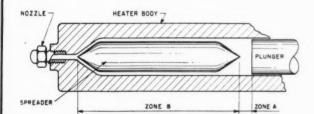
Cross-Sectional View of Typical Heating Chamber
